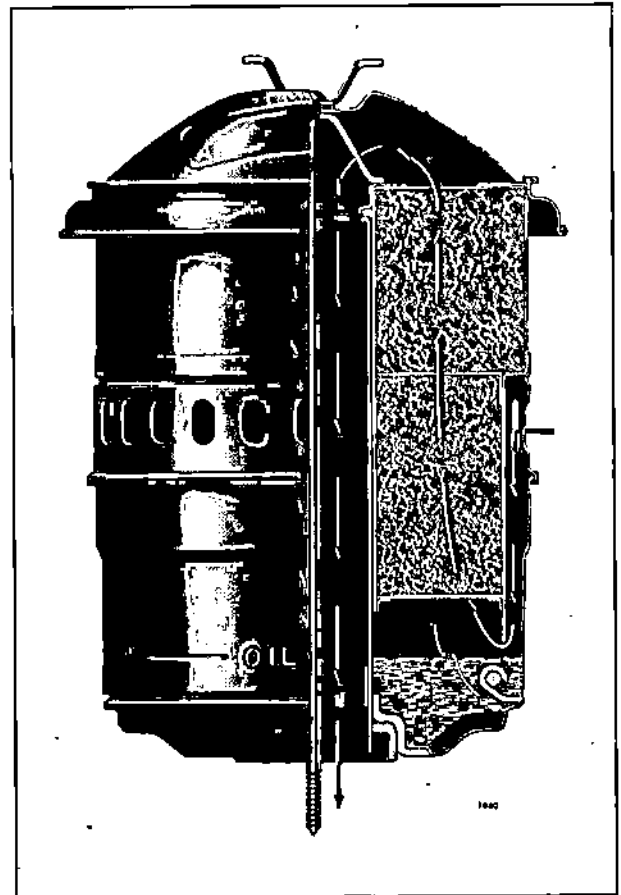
Light Duty Oil Bath Air Cleaner Assembly
